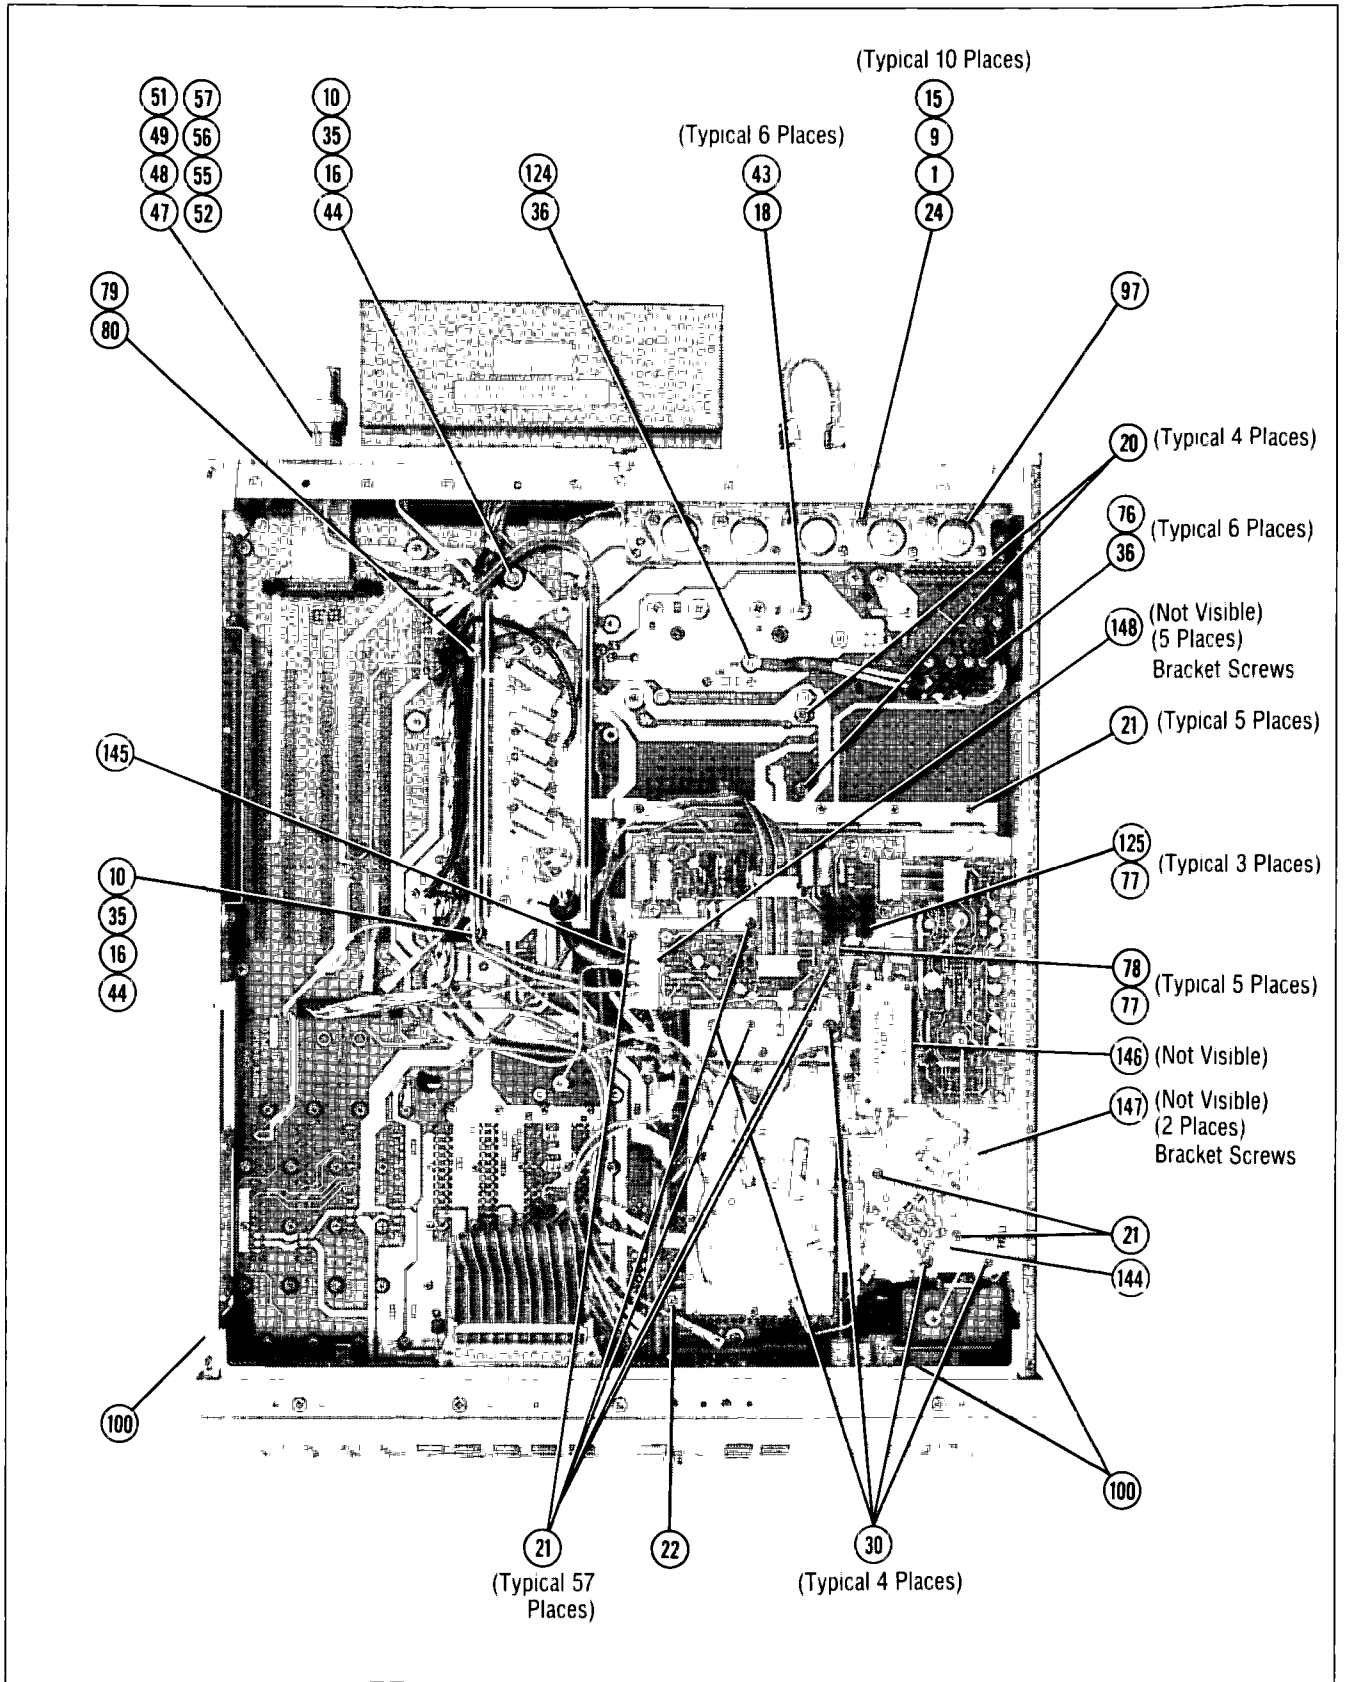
Miscellaneous Mechanical & Chassis Parts (3 of 6)
